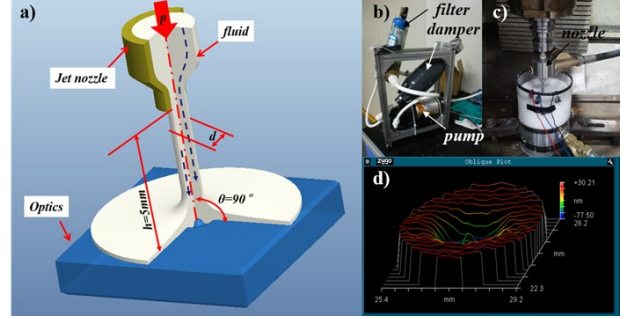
(a) Schematic diagram of the vertical jet setup and definition of parameters (b) Hydraulic system of FJP (c) FJP tool head and workpiece hold (d) Removal function's 3D profile
